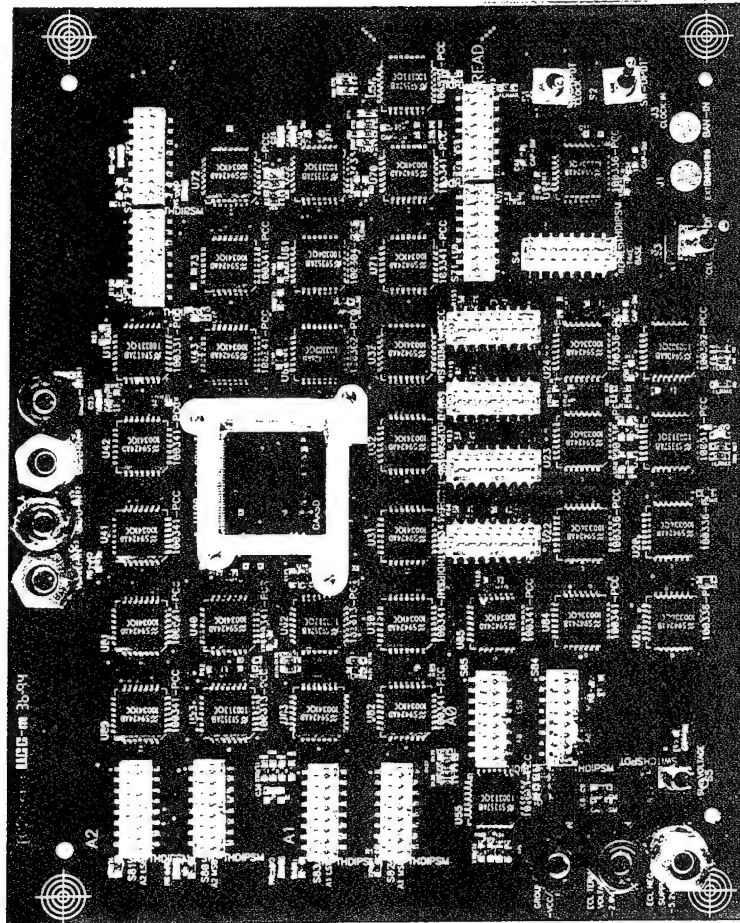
ASSEMBLED PRINTED CIRCUIT BOARD (TOP VIEW)
